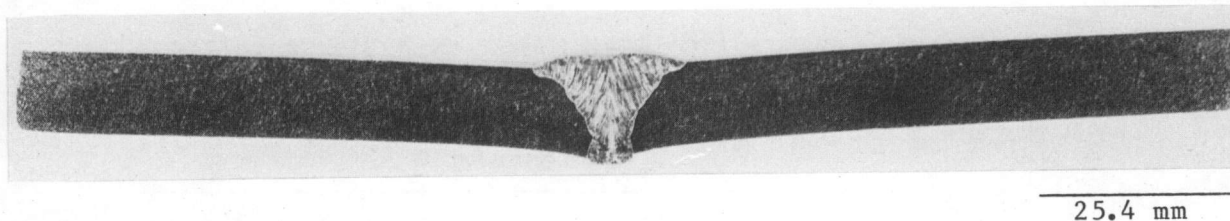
Cross Section of 16-8-2 Pipe Weld.
